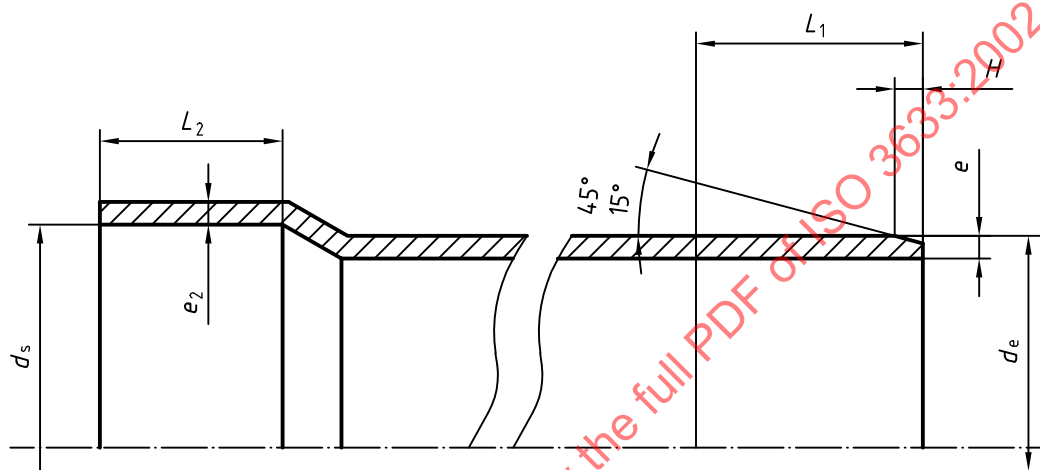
Basic dimensions of sockets and spigots for solvent cement joints
